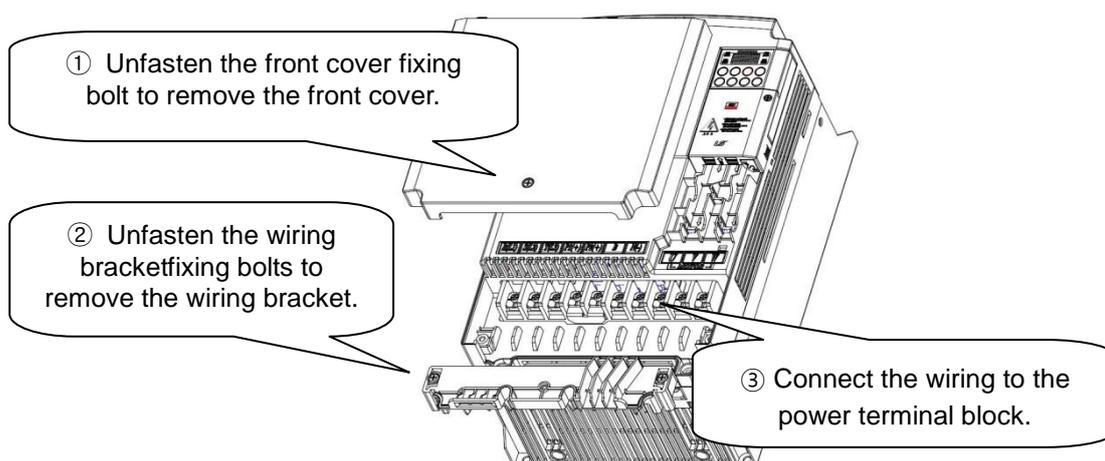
Removing the front cover and wiring bracket (15 kW 200 V - 22 kW 200/400 V)
